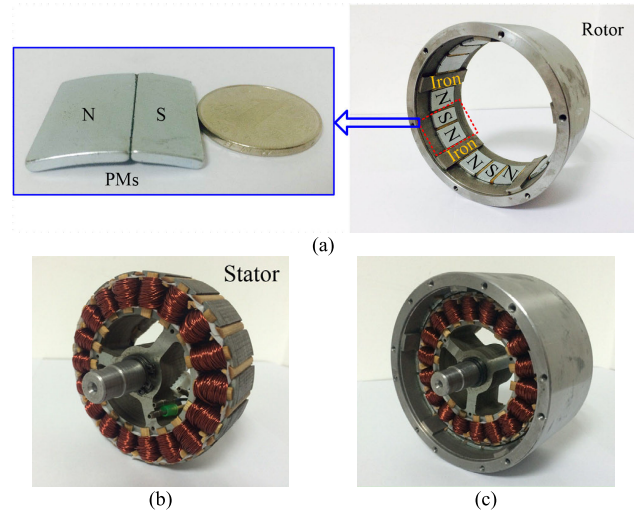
CP AMP prototype machine. (a) APM PMs and CP AMP rotor. (b) Stator. (c) Assembled stator and CP AMP rotor.
